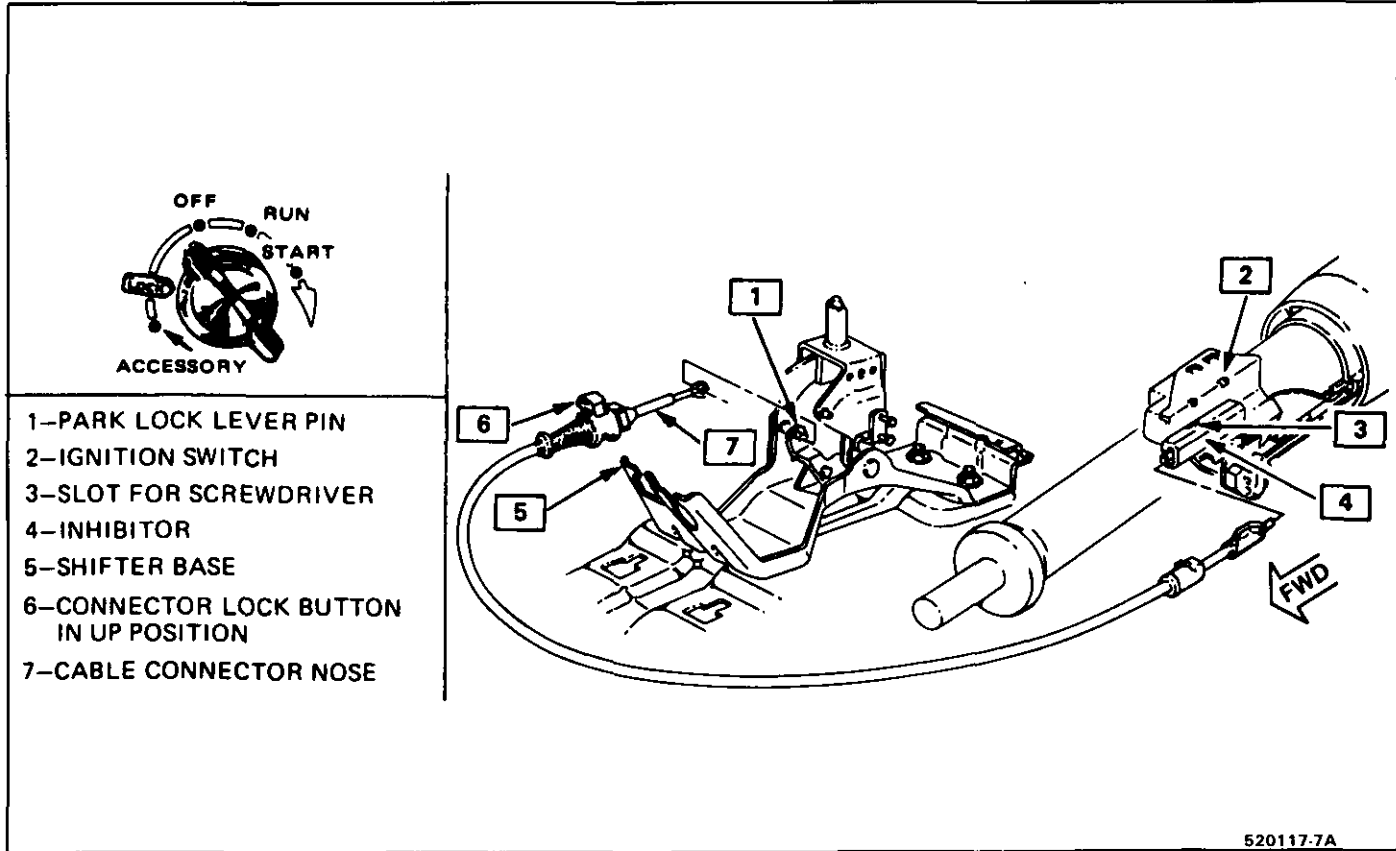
A1-4 Park Lock Cable Adjustment Illustration
